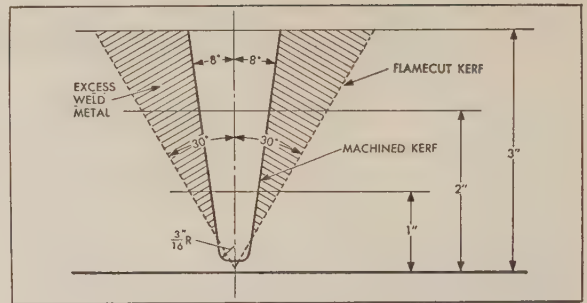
COMPARISON BETWEEN "U" AND "V" WELDING KERFS
